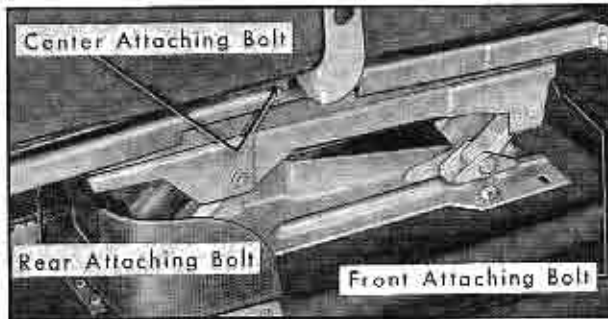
Detaching Seat Assembly from Adjusters (Sedans)
